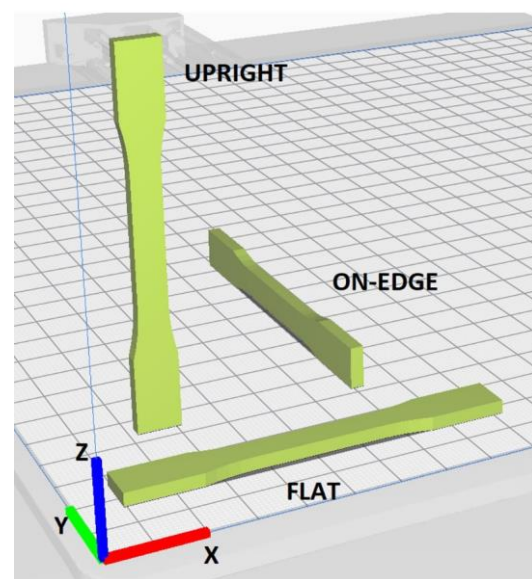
The tensile test specimens CAD model showing the three test configurations: flat, on-edge, upright build orientations
